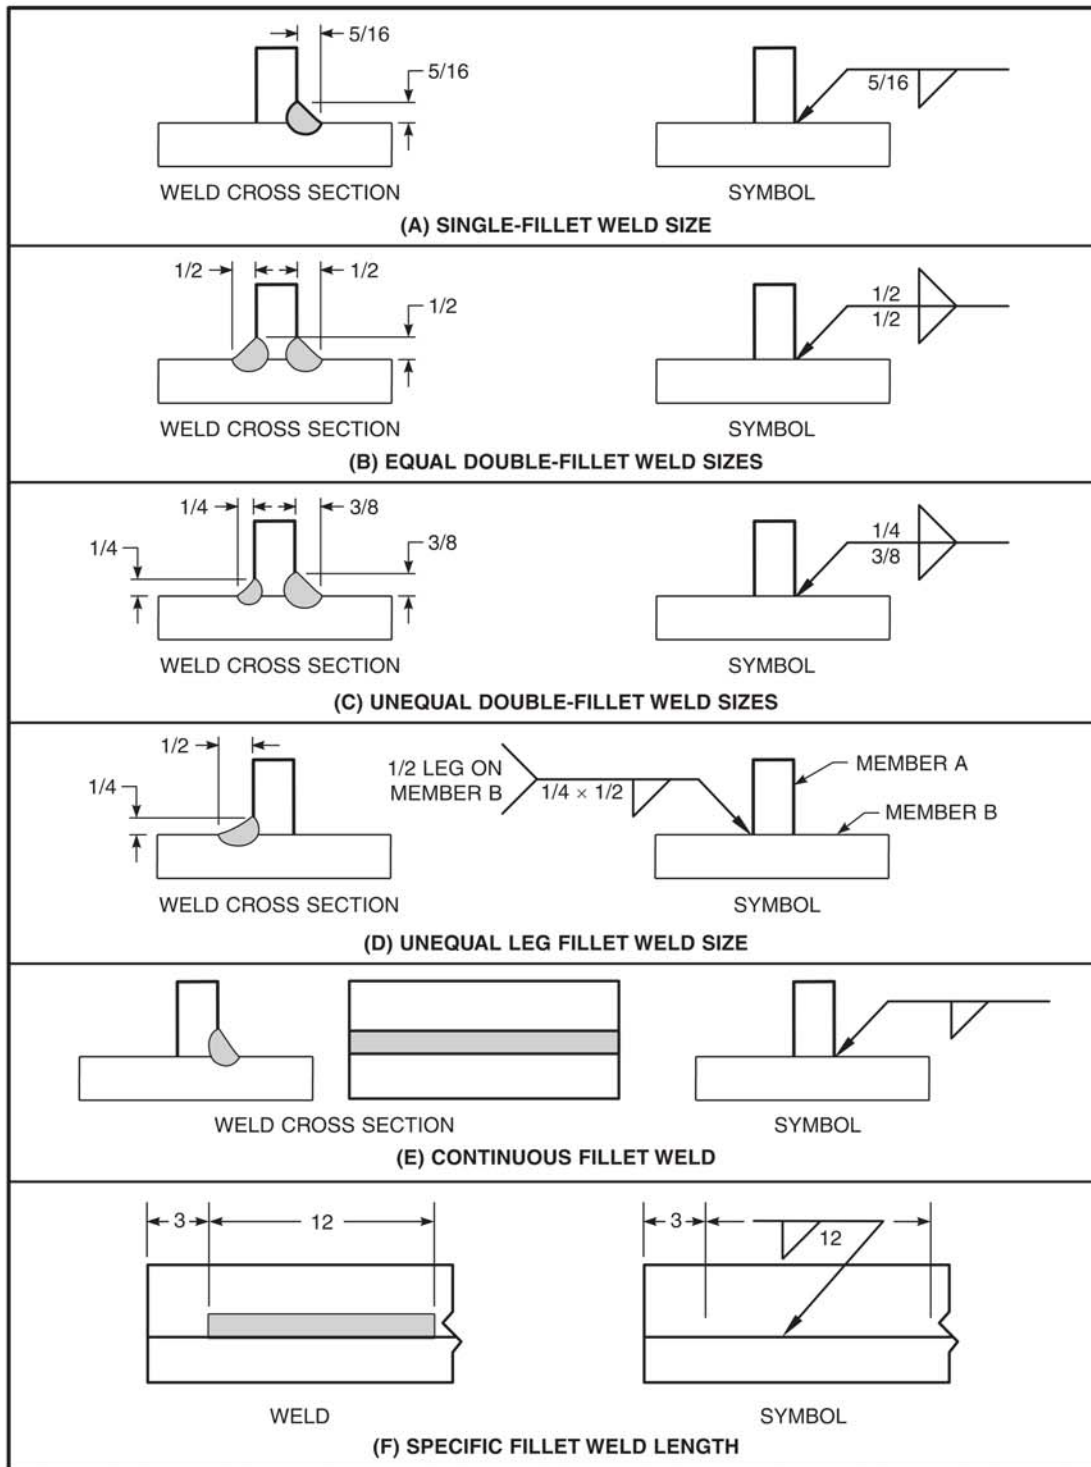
Application of the Symbols for Fillet Weld Size and Length
